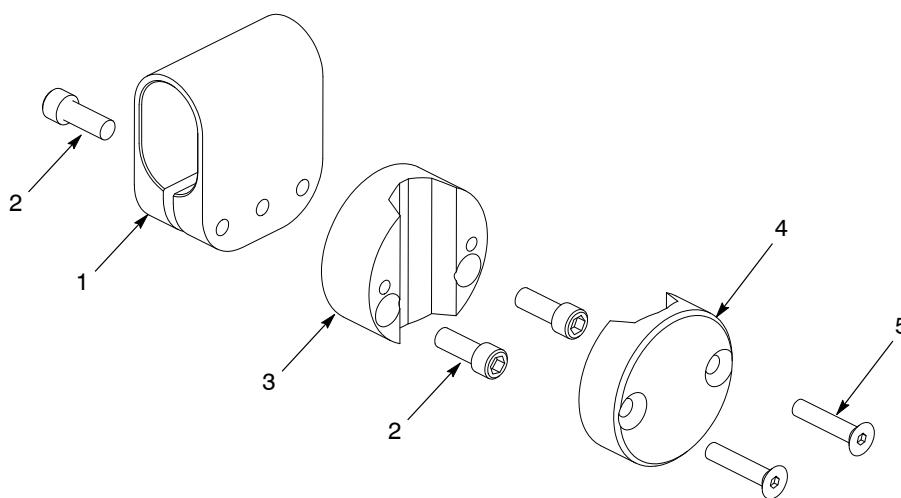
Vertical Bar Gun Mount for Sure Coat/Encore Tube-Mount Guns
